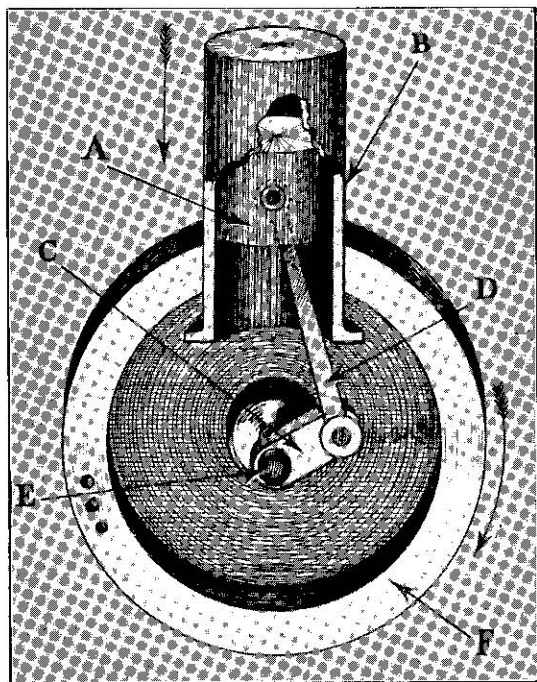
DIAGRAM ILLUSTRATING HOW A PISTON (A), SLIDING IN A CYLINDER (B), ROTATES THE FLYWHEEL (F)
